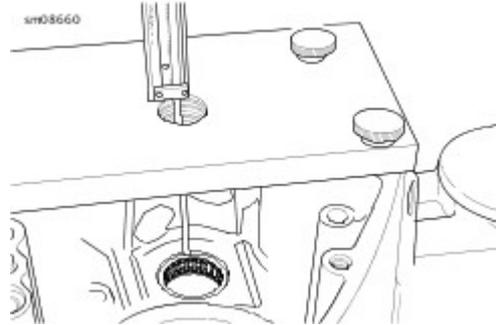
Measure from Top of Support Plate to Edge of Needle Bearing
